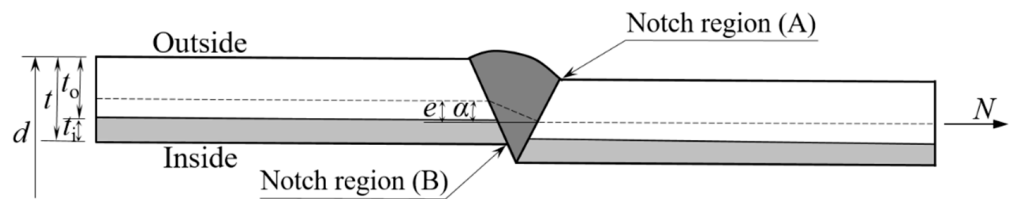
Longitudinal section through single-side welds of a bi-layer pipe.
